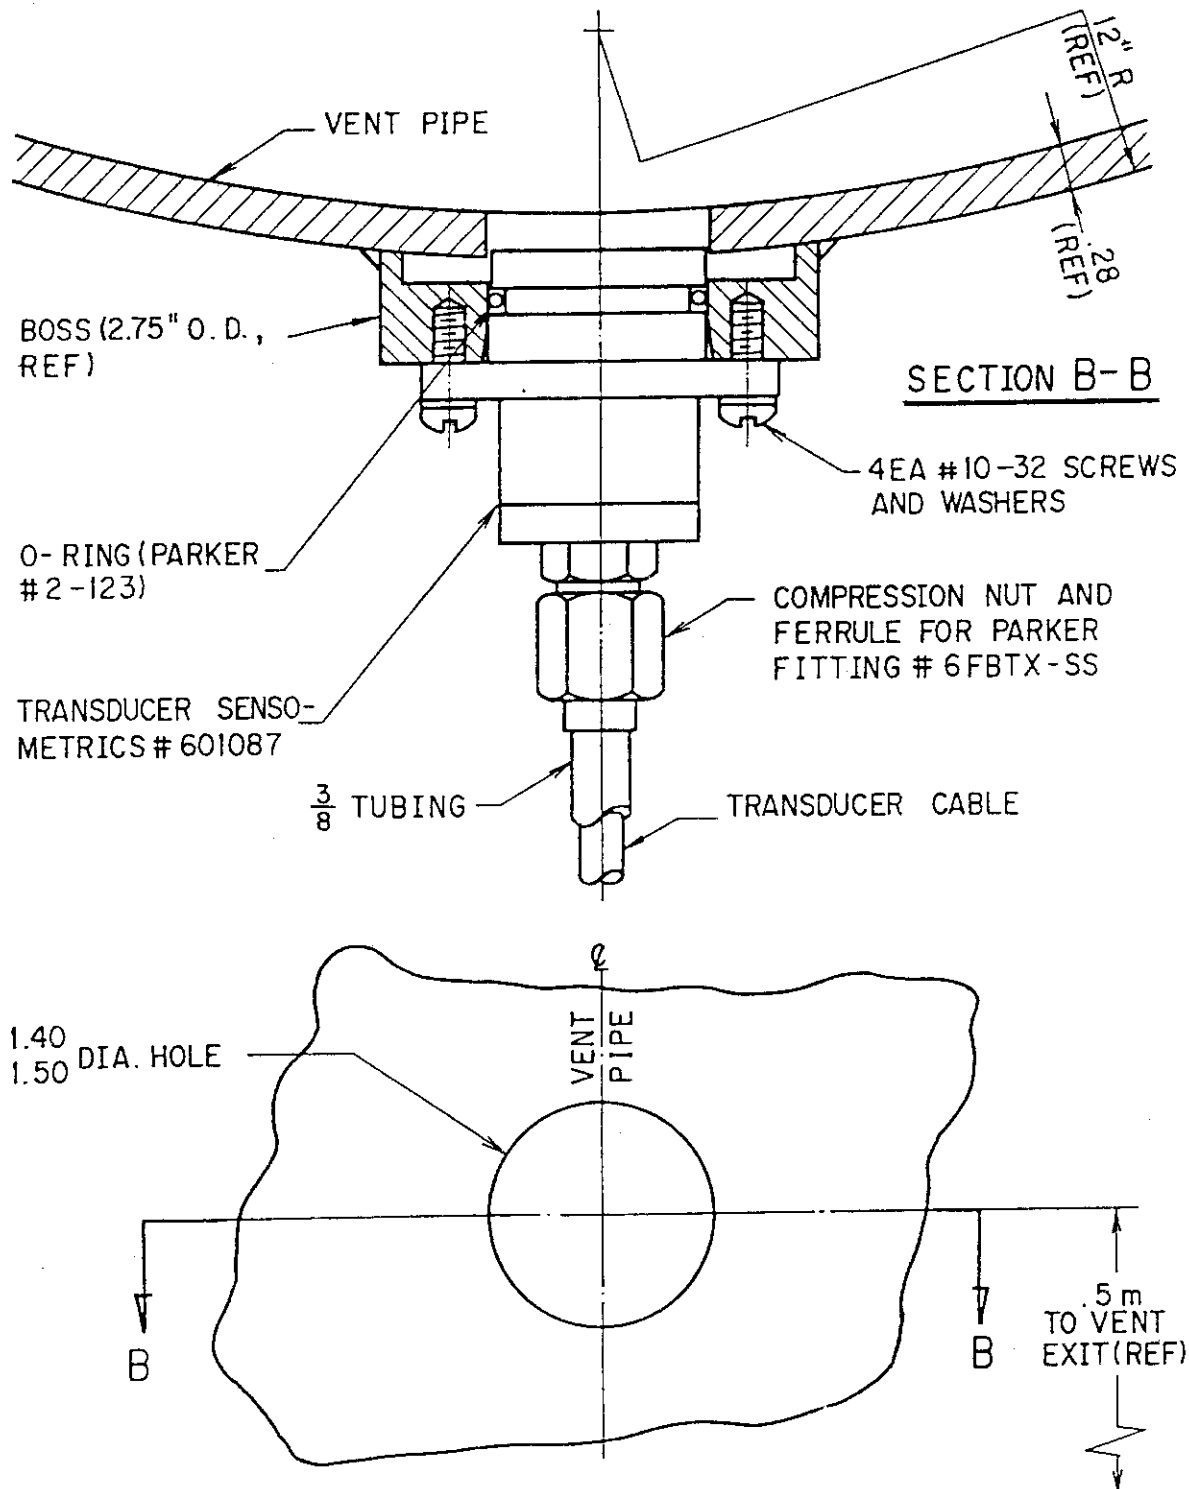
Schematic of installation of flush-diaphragm strain-gage type pressure transducers on vent pipe
